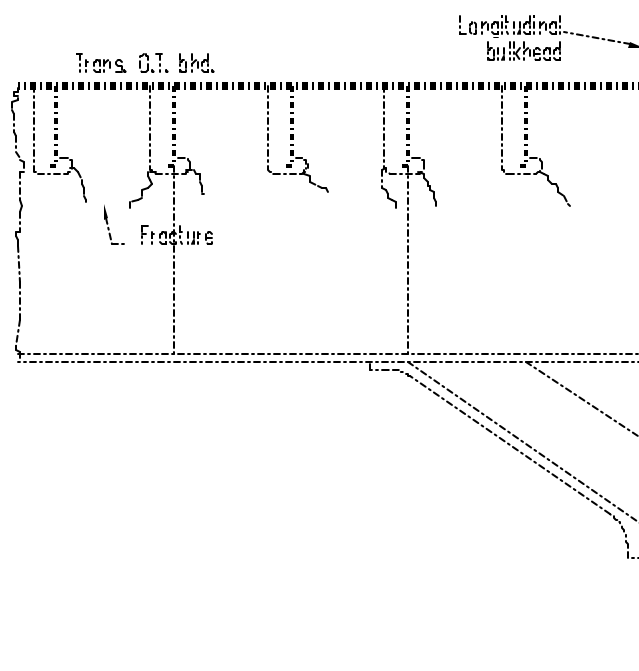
Fractured centre tank stringer bracket connection to the longitudinal bulkhead.
